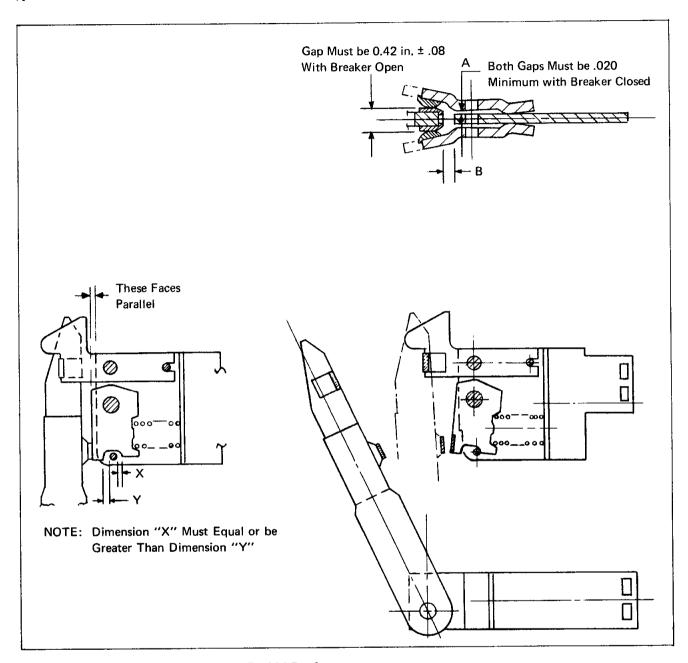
Contacts and their Adjustment, DS-206 Breaker
